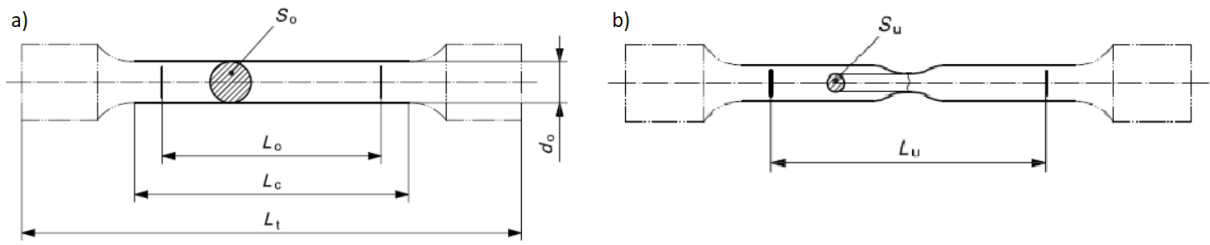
Example of a test specimen with circular cross-section a) before and b) after testing, with essential dimensions (L_t – overall length of a test specimen, L_c – parallel length, L_0 – original gauge length, S_0 – initial cross-section of the tested area, d_0 – initial diameter of a parallel length, L_u – final gauge length after fracture, S_u – minimal cross-section after fracture) [12]
